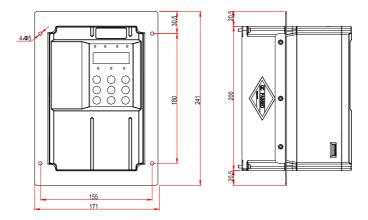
Mounting Dimensions of MD500ET45G(B) to MD500ET160G
